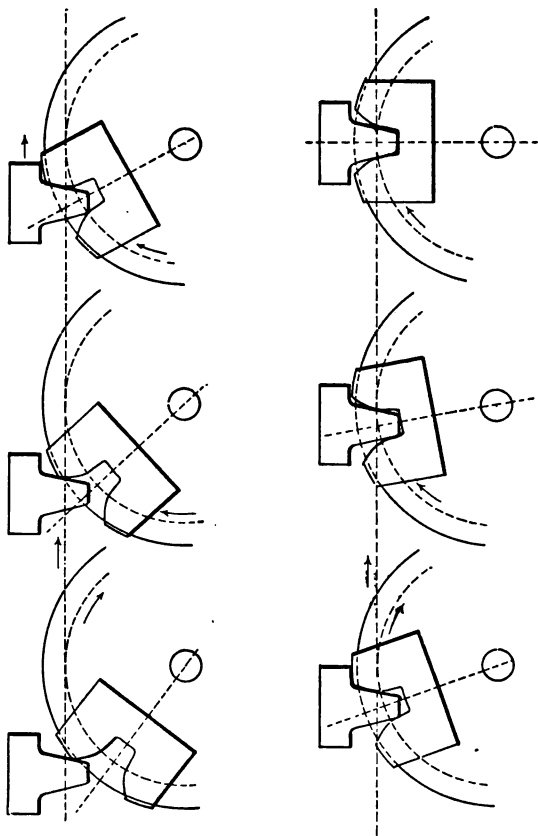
Formation of a Gear Space from a Rack Tooth.
